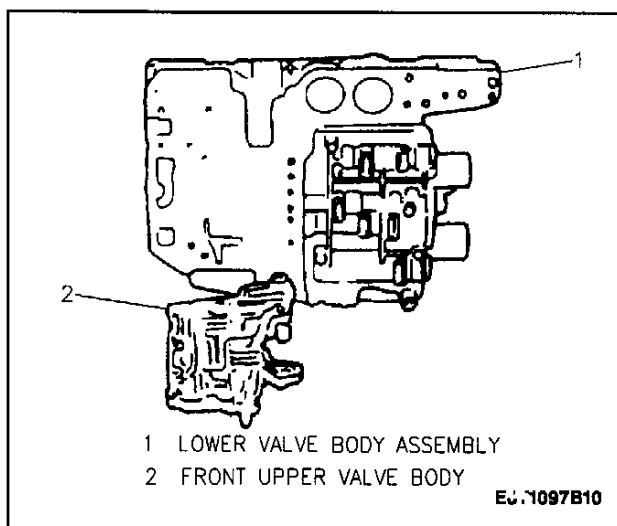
Installing Lower Valve Body to Front Upper Valve Body (03-72LE, 4-Speed)
